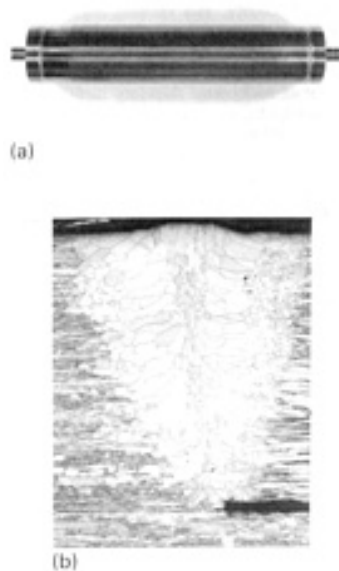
ELECTRON-BEAM WELD ZONE IN HIGH-PURITY MOLYBDENUM. (A) MOLYBDENUM HEAT PIPE TEST ASSEMBLY SHOWING END CAPS JOINED BY EBW. (B) PHOTOMICROGRAPH SHOWING MORPHOLOGY OF WELD FUSION ZONE. 25×
